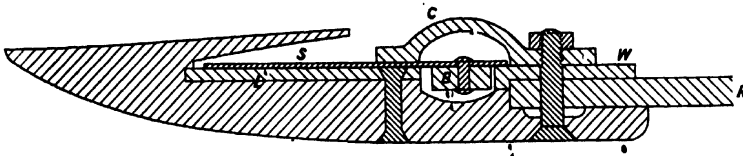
SECTION OF FINGER BAR AND BLADE.
